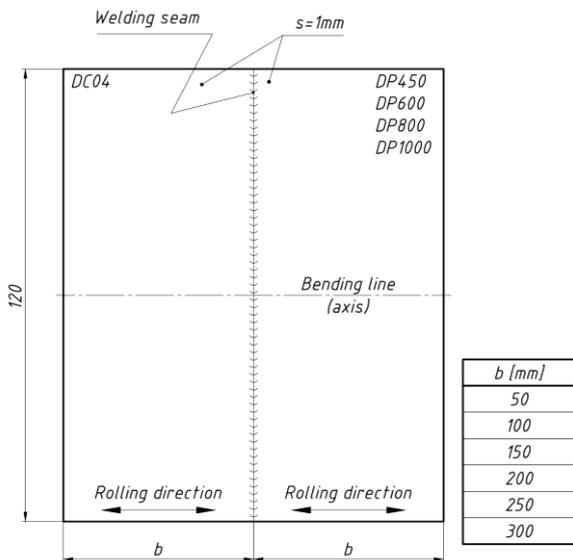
Initial blanks for evaluate angle of the springback of the welded sheets from different strength steel sheets.
